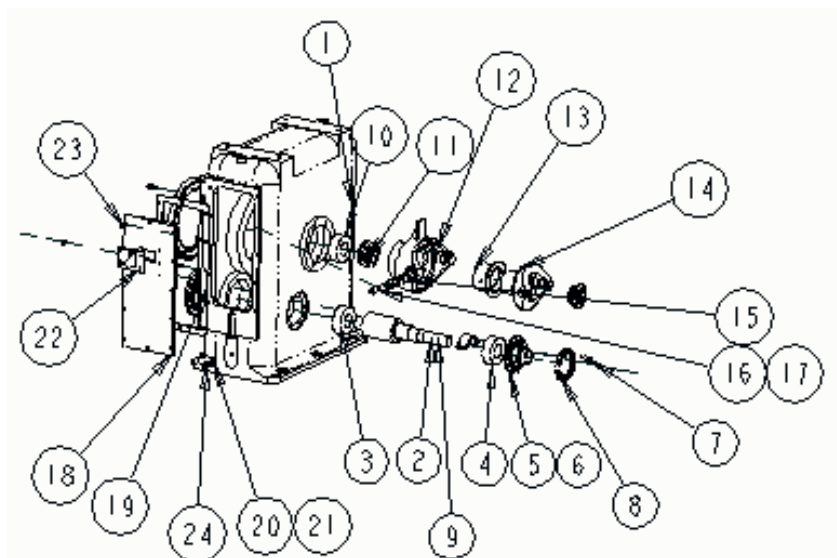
DISASSEMBLING AND ASSEMBLING OF PINION SHAFT
